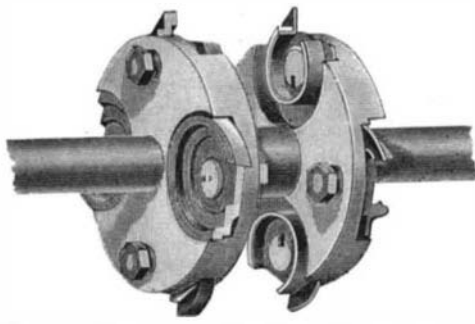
HEADS FOR BOX BOARD MATCHING.
